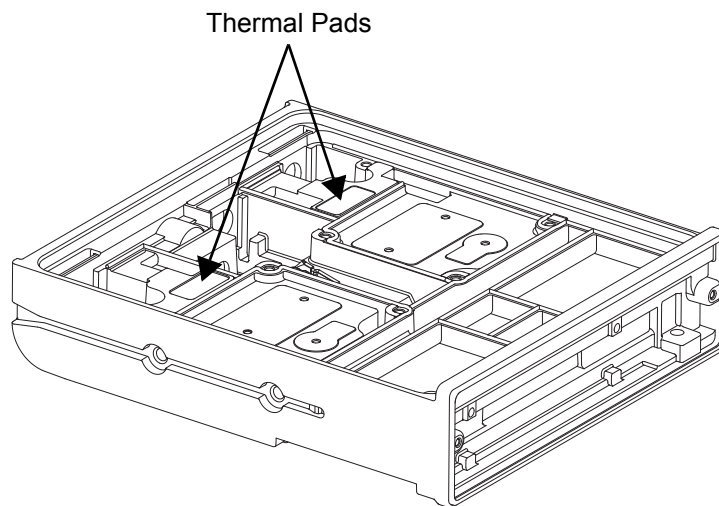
Inspecting the Chassis Shield Gasketing and Thermal Pads
